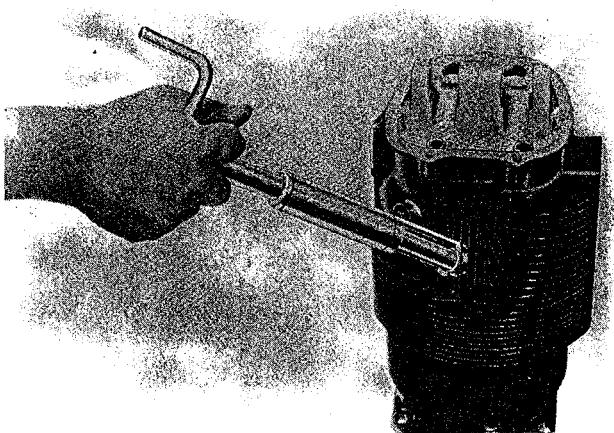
Installing Spark Plug Hole Helical Coil Insert.
